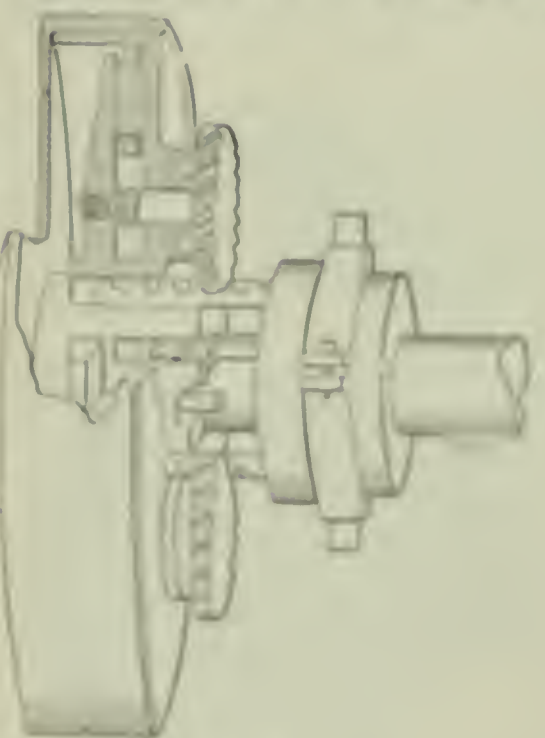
DRIVING MACHINERY DIRECT FROM LINE SHAFT WITH JOHNSON CLUTCH
